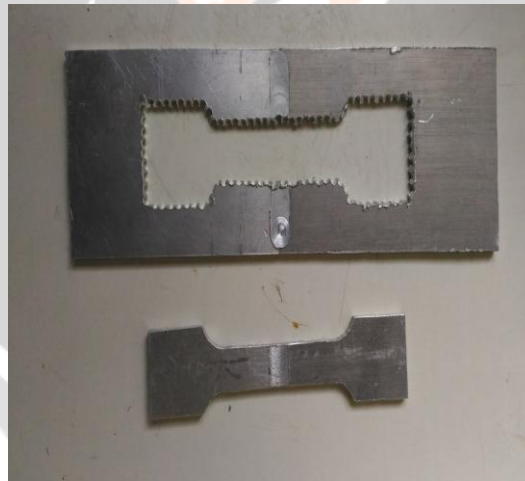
Dimensions of the Test Specimens as Per ASTM Standard
